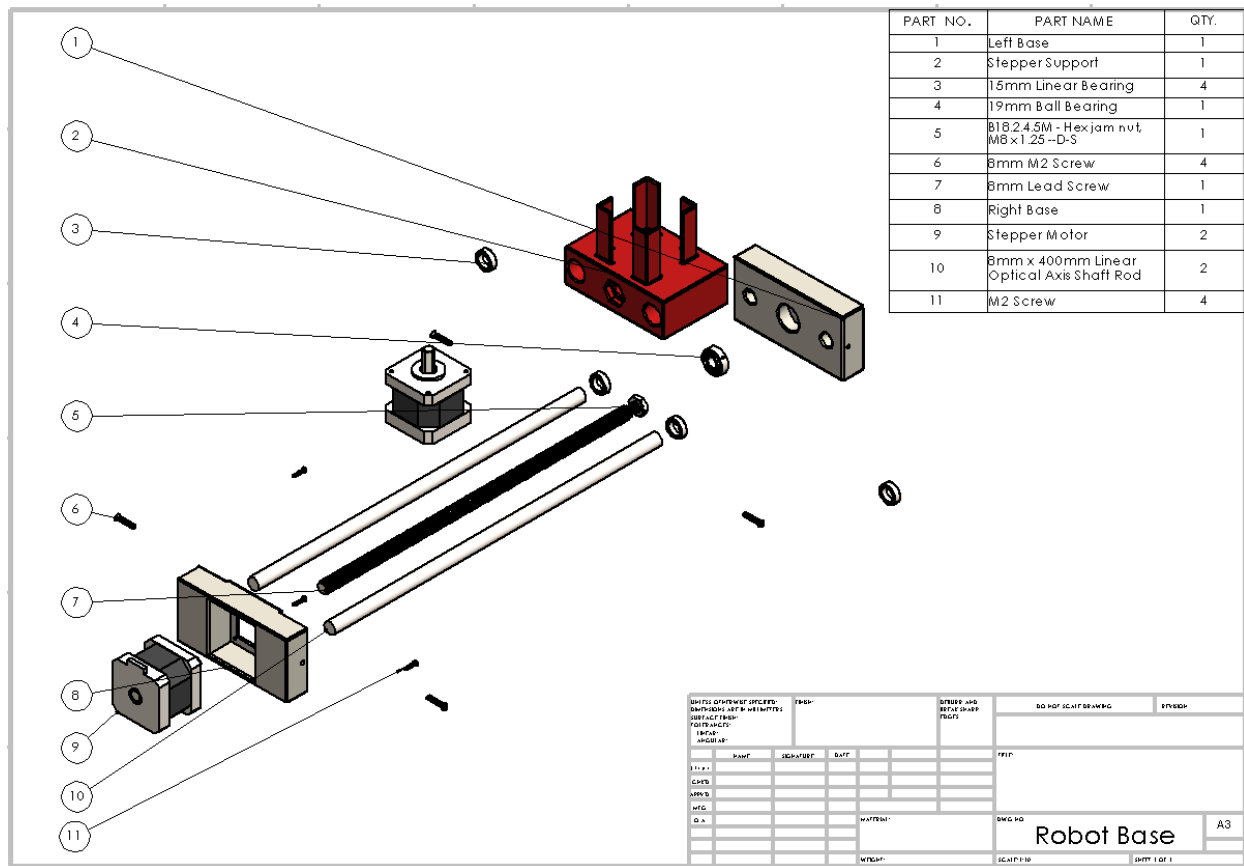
Assembly Drawing of Robot Base Subsystem with BOM
